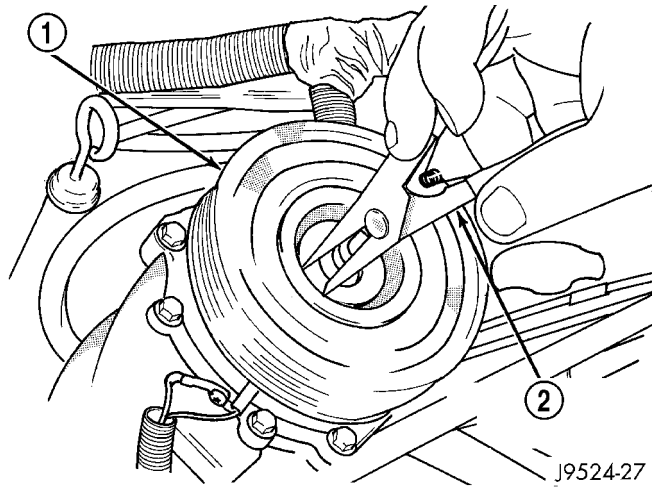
EXTERNAL SNAP RING REMOVE - Typical
